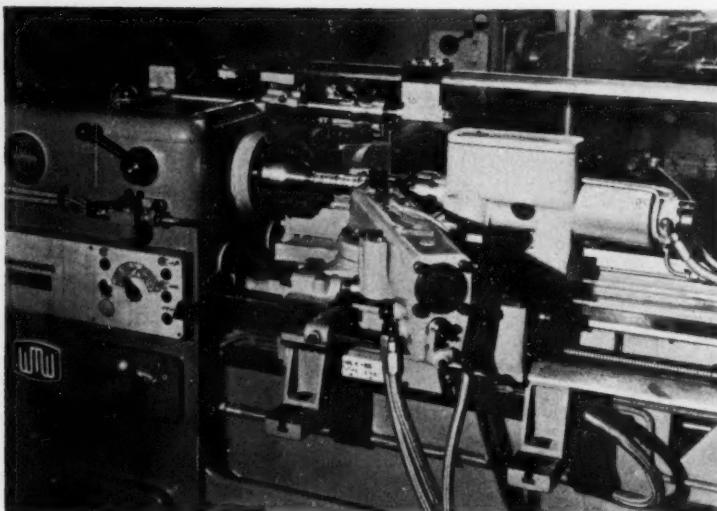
Magdeburg Type DXHDK32 Copying Lathe which is Fitted with Front and Rear Tool-slides
